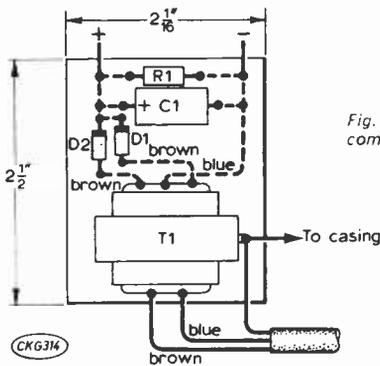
The wiring of the components on the drilled s.r.b.p. board.
